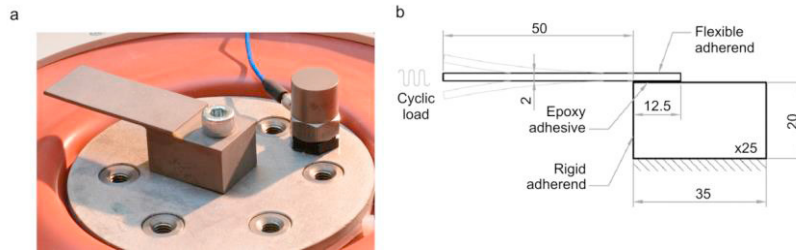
A joint specimen mounted on the shaker (a) and dimensions (b) of sample used in peel fatigue strength testing.
